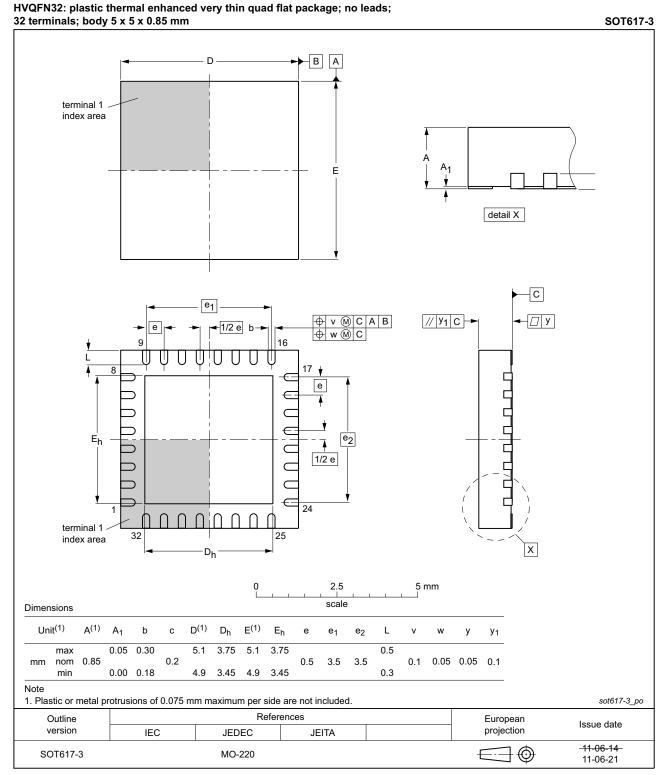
Package outline SOT617-3 (HVQFN32) of PCA8561
